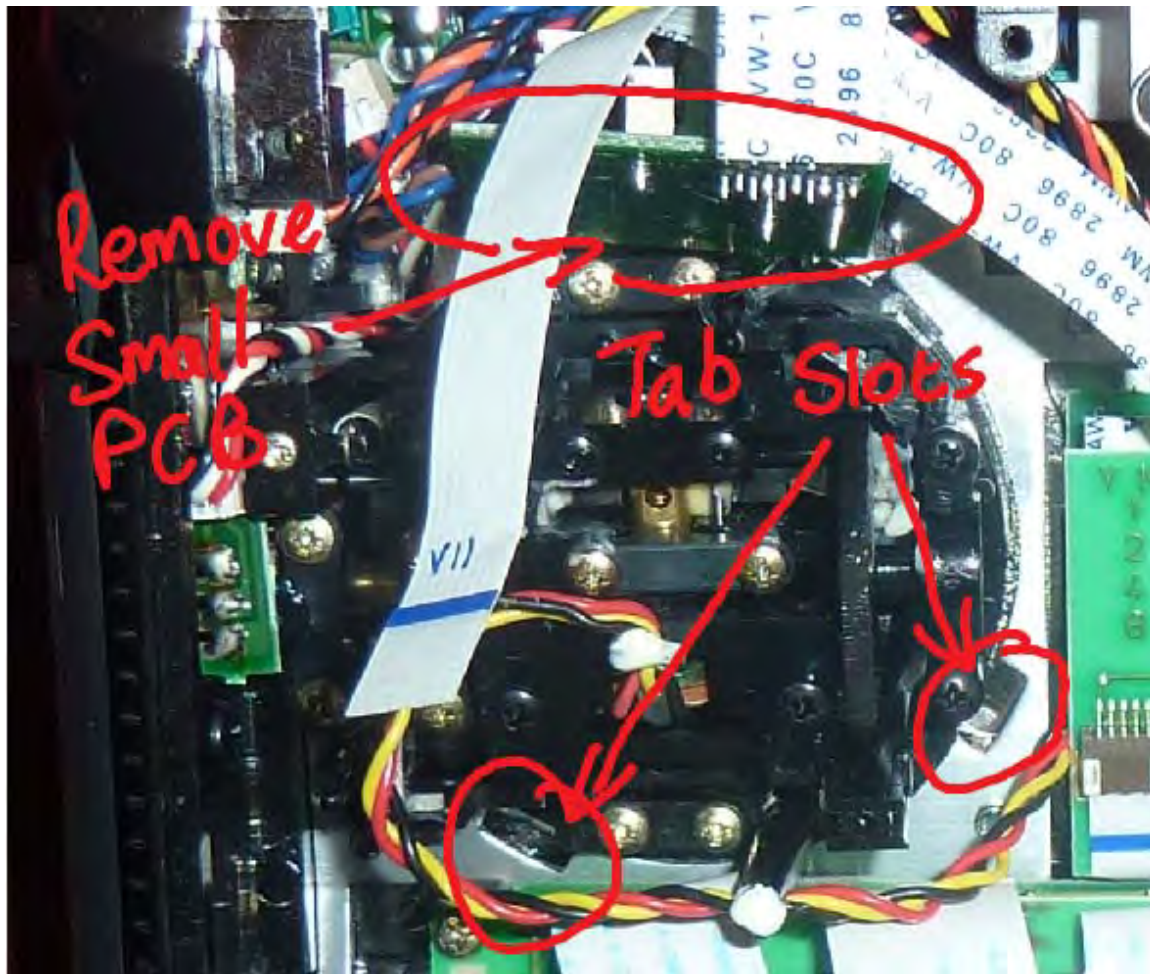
Removal of Joystick Assembly - Small PCB and "Hidden" Tab Slots
